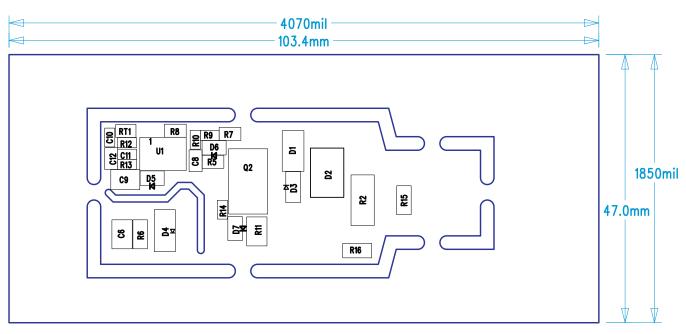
LM3447-A19-230VEVM Bottom Assembly Drawing (bottom view)
